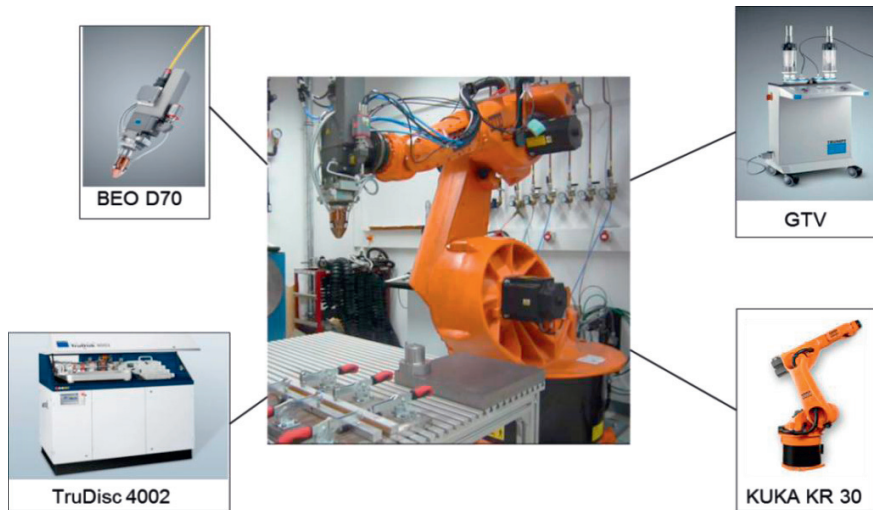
Experimental setup for Laser Metal Deposition Welding (LMD) [1].
